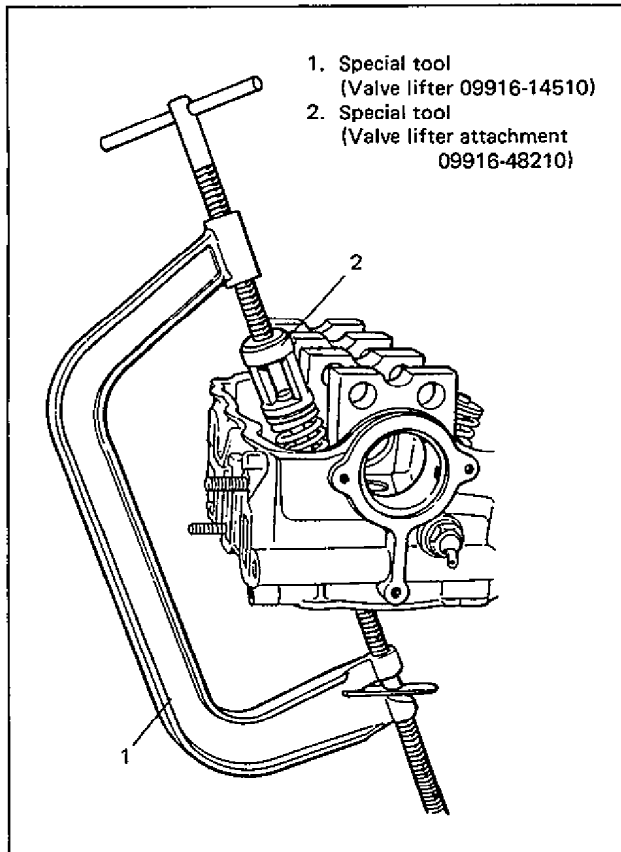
A-77 Special Tool (Valve Lifter) Installation
